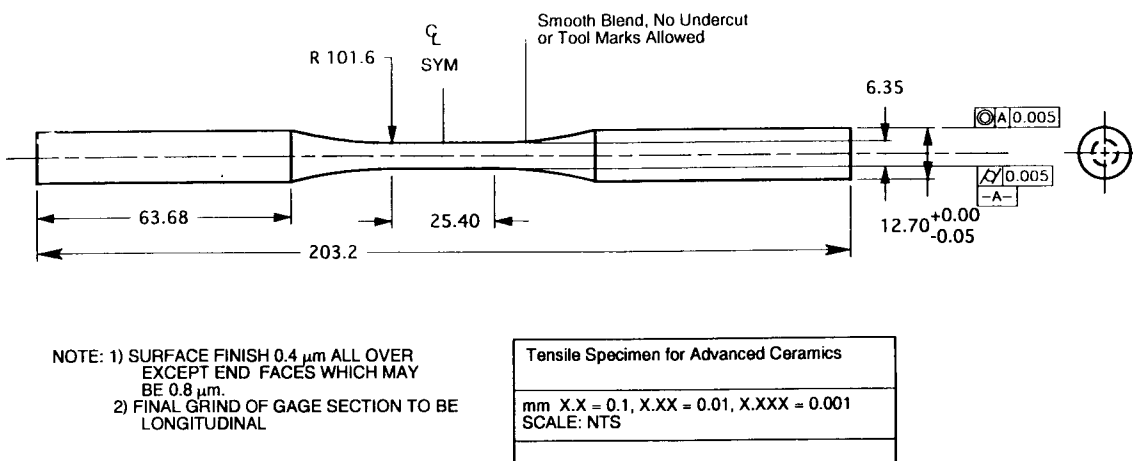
Example of a Cylindrical, Straight-Shank Tensile Specimen (2)
